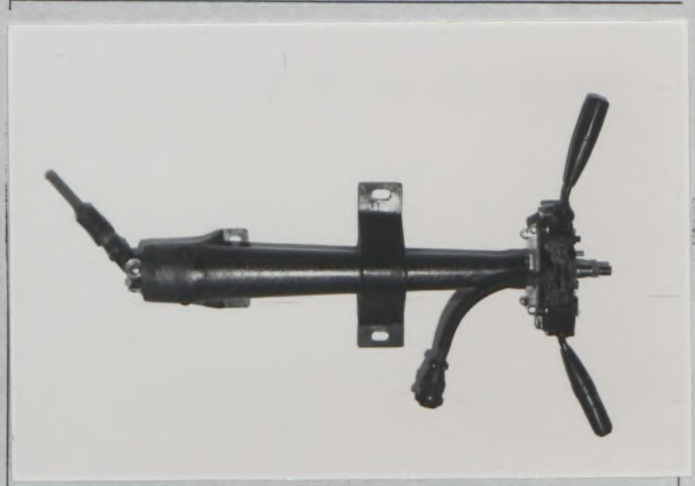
REINFORCED STEERING COLUMN TYPE B
